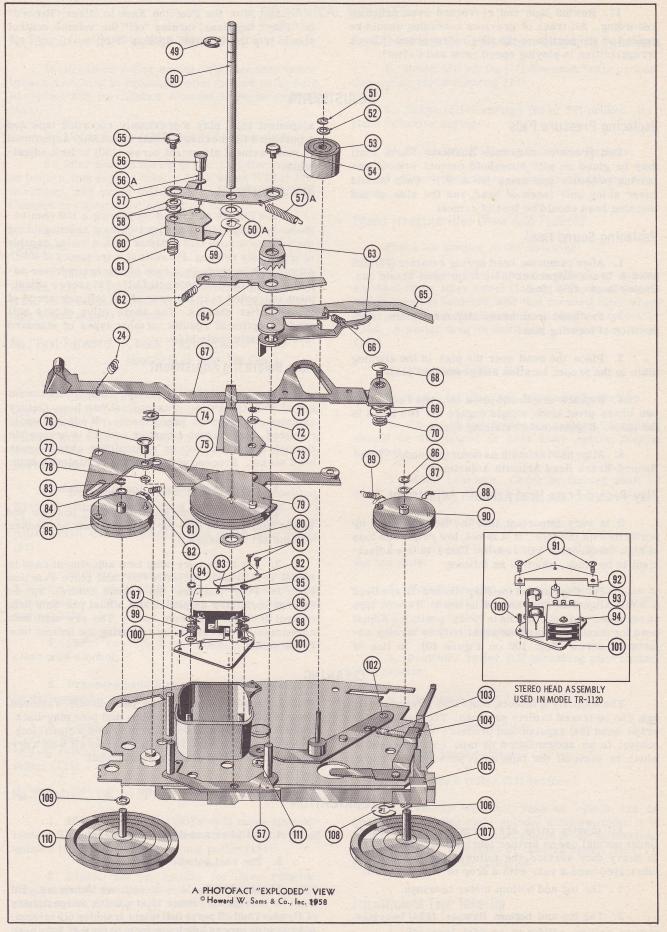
Exploded View Of Upper Plate Mechanism Sub-Assembly.
